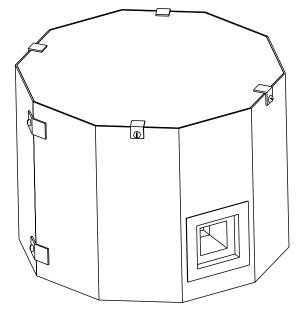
After filling the shell with fiber blanket the metal end shell is screwed into place. Notice the burner block protrudes through the shell-
